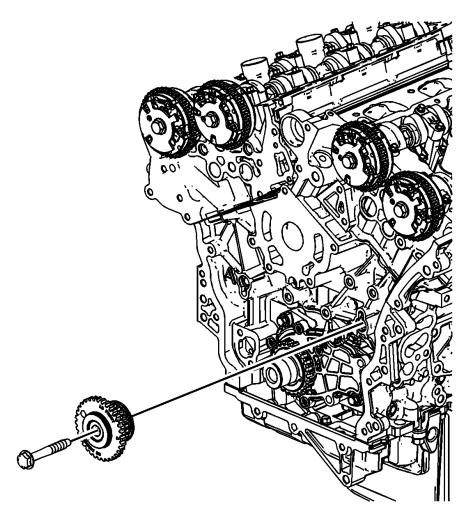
View Of Camshaft Intermediate Drive Chain Idler & Bolt
